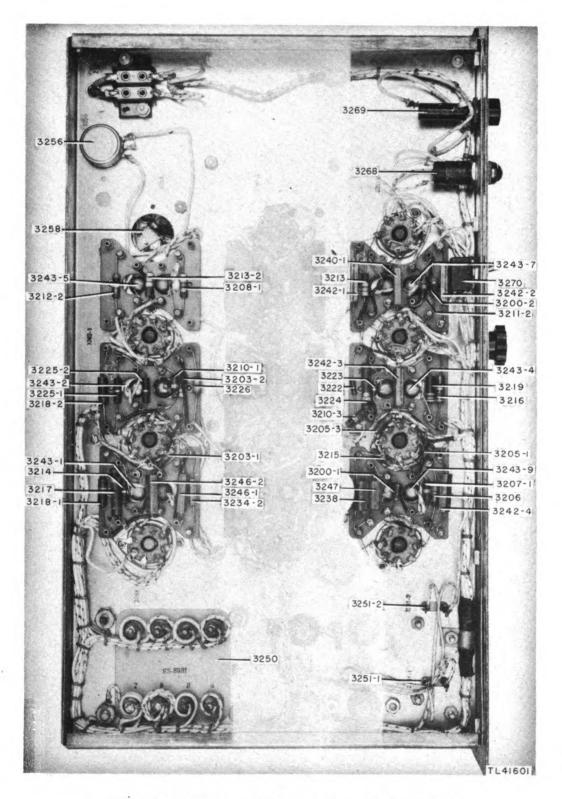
Calibrator I-189-A, bottom of chassis (1).
